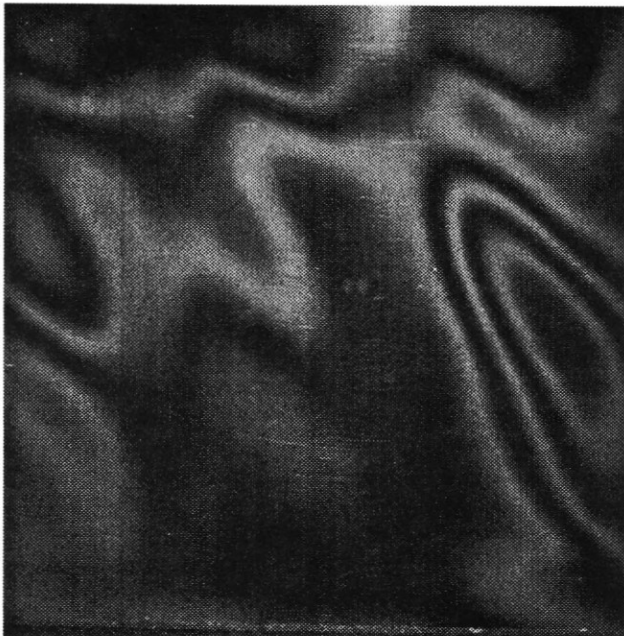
Moiré Fringe Pattern at Outboard End
